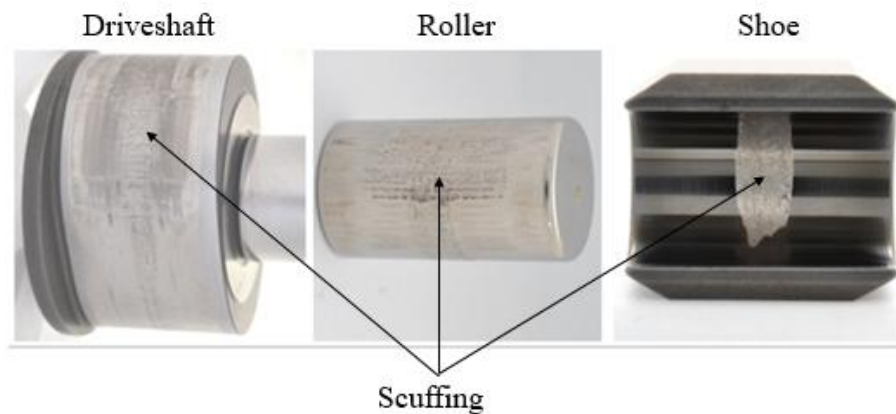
Roller, shoe and drive-shaft with scuffing after an aggressive test [4].
